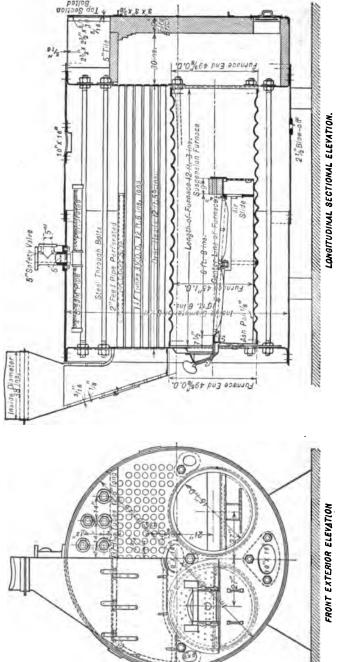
INTERNAL FURNACE BOILER OF 250 HP. SCOTCH MARINE TYPE.
